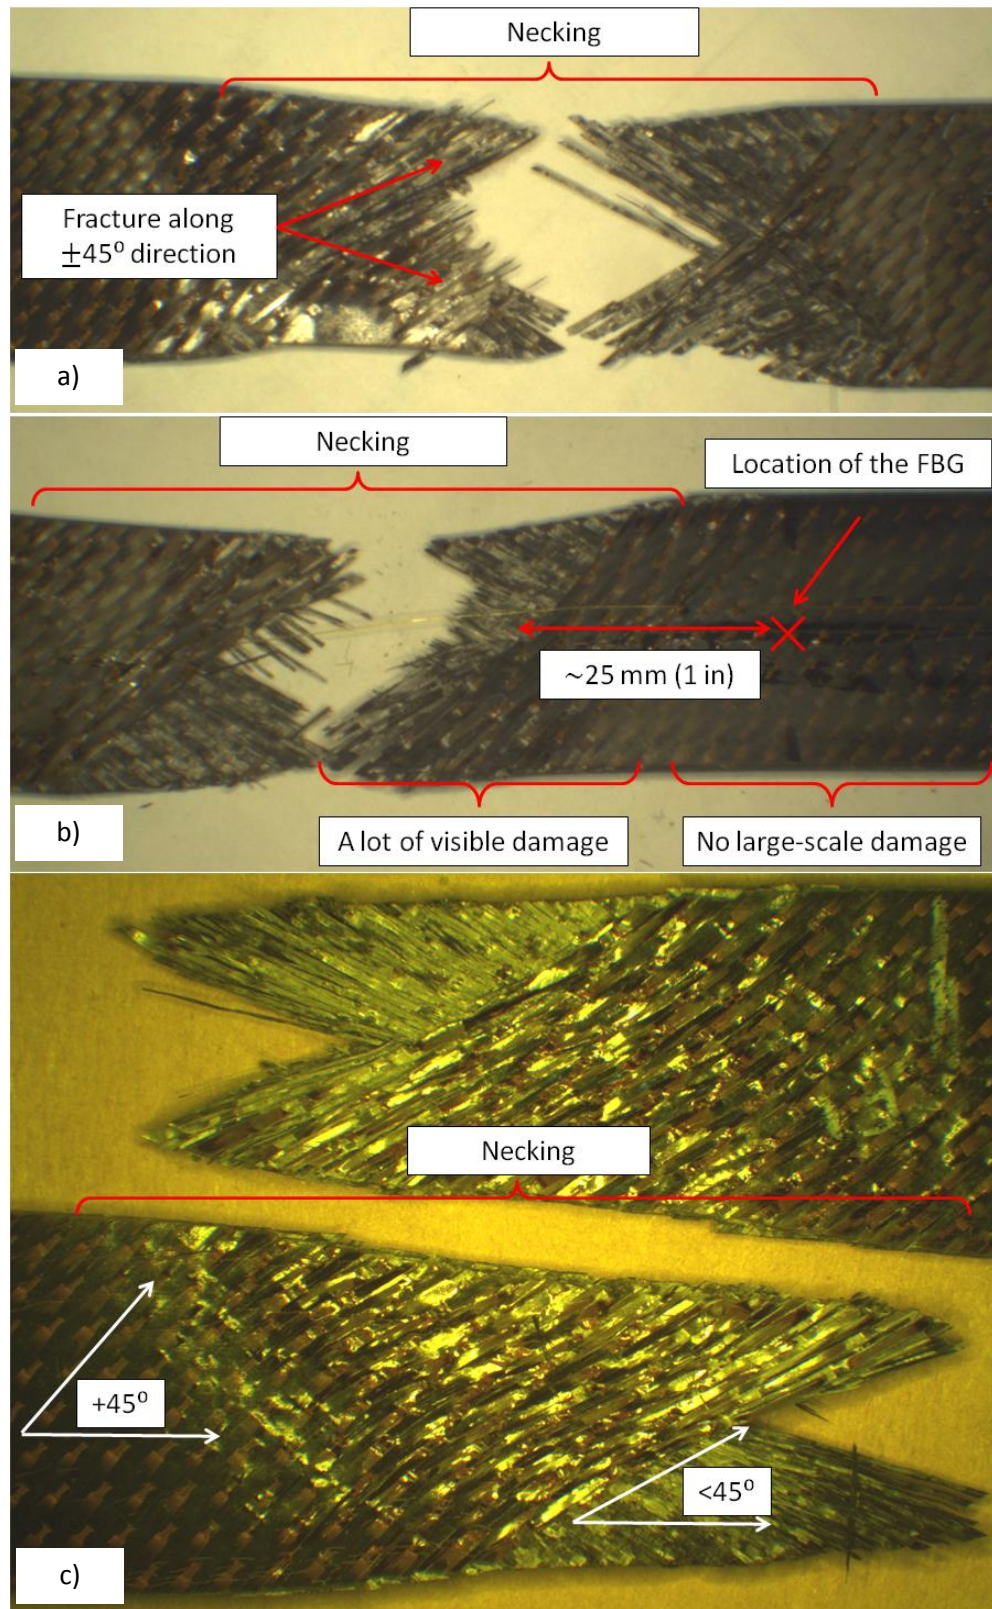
Fracture surface of specimens fatigued at a) RT, b) 105°C and c) 205°C.
